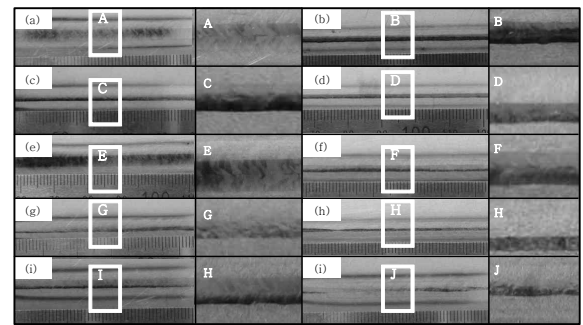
Bead appearance according to arc length and welding speed : (a) 0.5mm, 6mm/sec (b) 0.5mm, 8mm/sec (c) 0.5mm, 10mm/sec (d) 0.5mm, 12mm/sec (e) 0.8mm, 6mm/sec (f) 0.8mm, 8mm/sec (g) 0.8mm, 10mm/sec (h) 0.8mm, 12mm/sec (i) 1.0mm, 6mm/sec (j) 1.0mm, 8mm/sec
